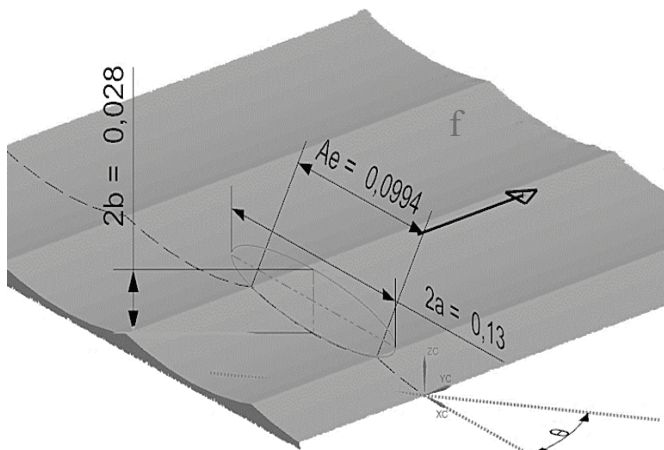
Ellipse position on segment of machined surface CAD/CAM
